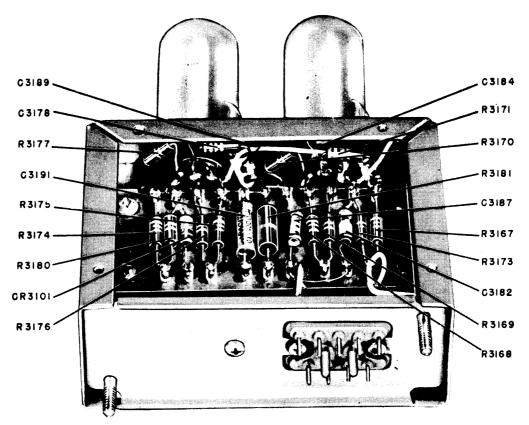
R-F Oscillator O-243/FRT-24, Interpolation Divider, Left-Side View, Location of Parts
